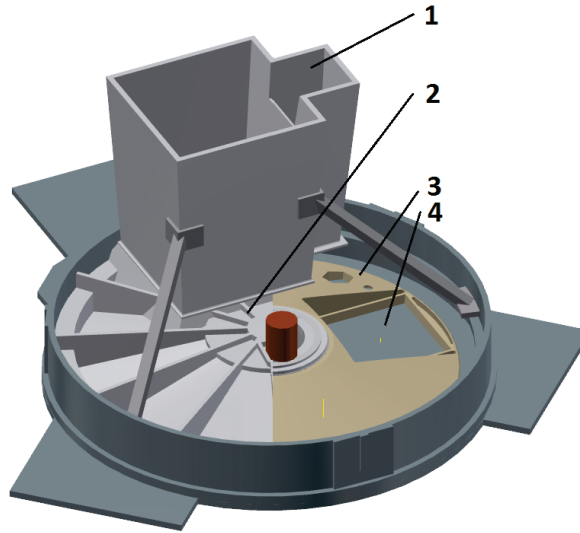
Geometry of WFI Filterwheel Assembly 1 – Baffle, 2 – Top Cover, 3 – Filterwheel, 4 – Filter on which the SPL must be minimized. The top cover is shown in half section to show the filterwheel
